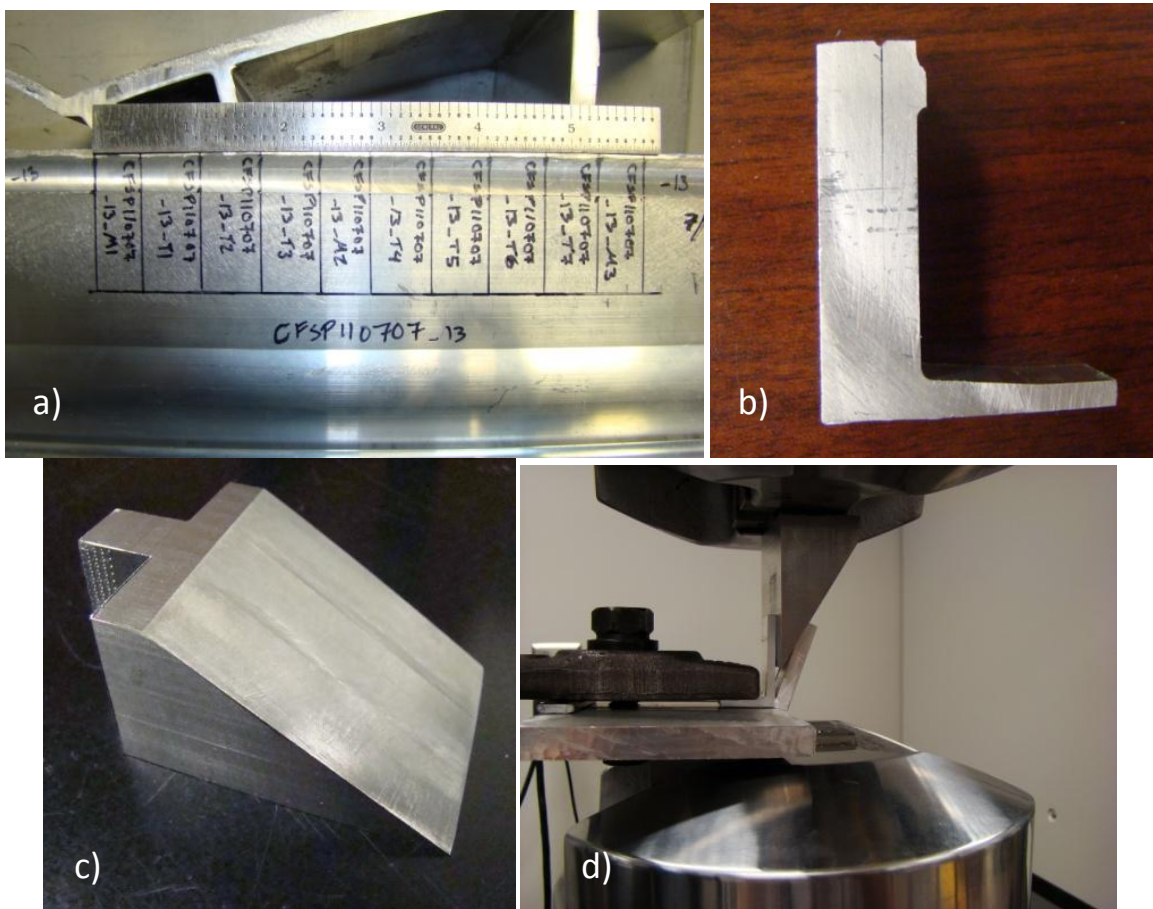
Sample test and wedge testing configuration: (a) cut plan for bumper-beam/crash-box welded assembly; (b) cut and polished sample awaiting testing; (c) 35° machined steel wedge; and (d) clamped sample undergoing wedge testing.
